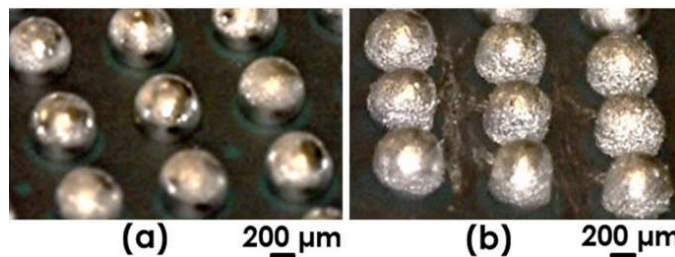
Optical images of (a) reference SAC305 solder balls and (b) exposed SAC305 solder balls (15min at 90°C) after liquid Ga excess removal.
